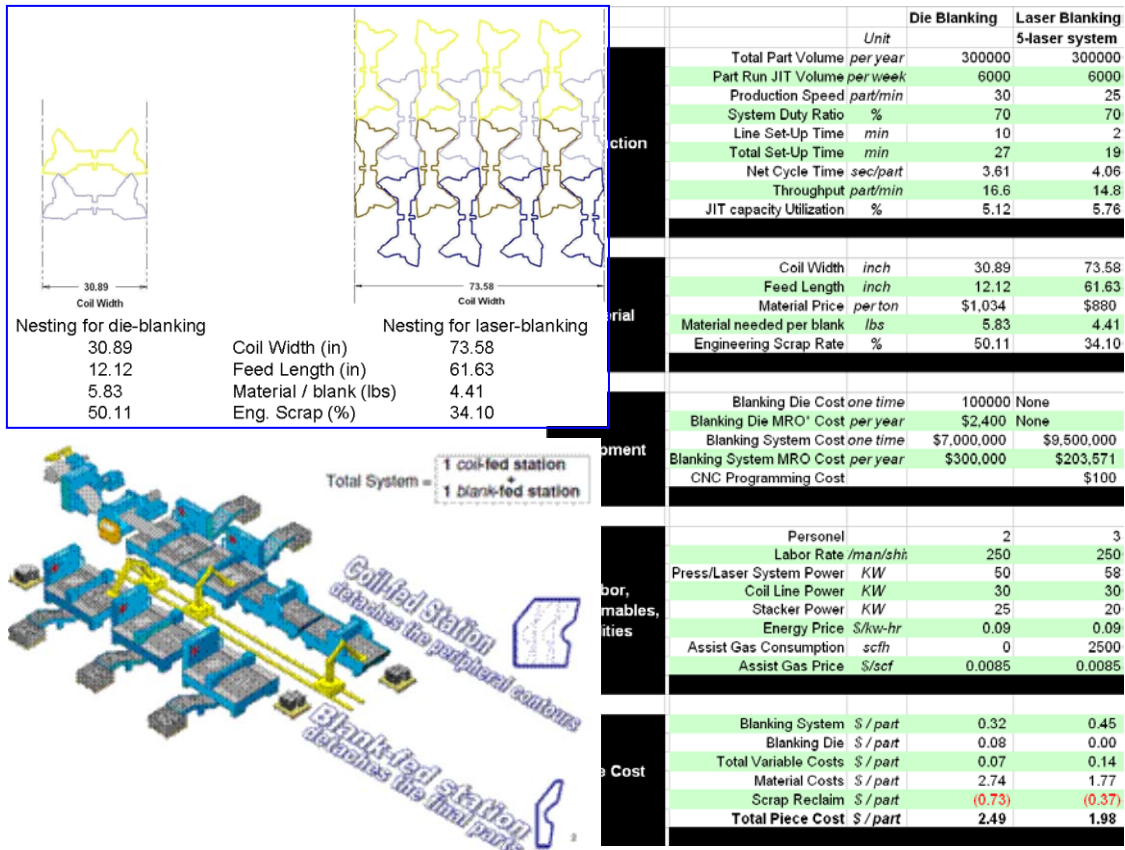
High speed blanker with 5 laser-cutting machines has throughput comparable to one press line Nesting for laser blanking can be done with large coil that do not need to be slit first and results in less engineering scrap. Laser blanking reduces piece costs, yields superior material utilization. It requires laser-cutting at extreme-speed extreme-power.
